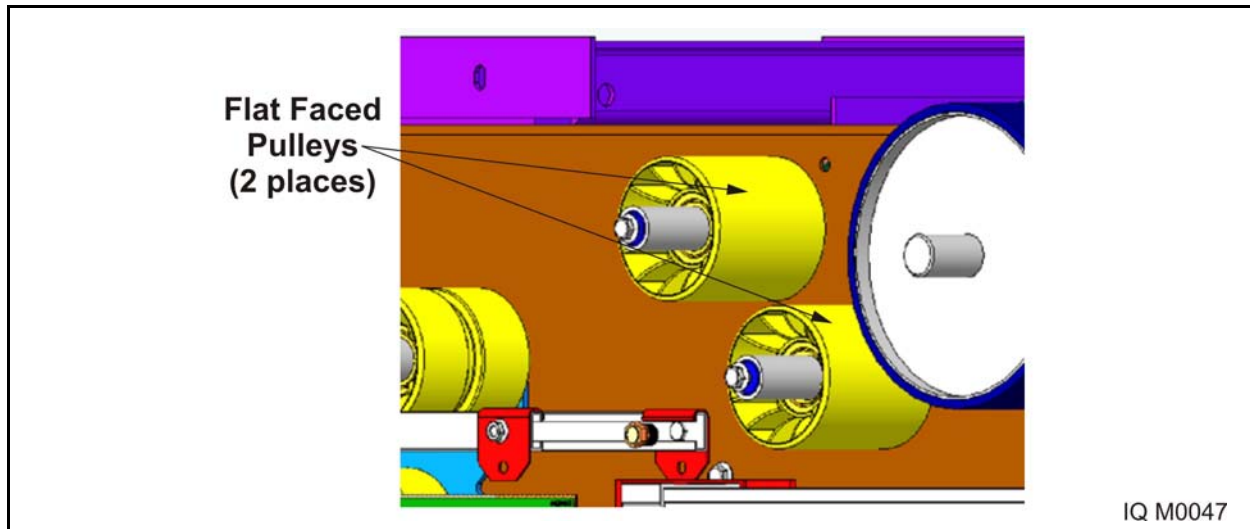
55 Flat Faced Pulleys on Drive (drive cover removed for clarity)
